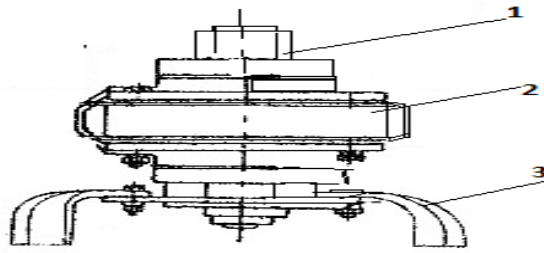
Rotor of section 1: shaft, 2-body, 3-knife
